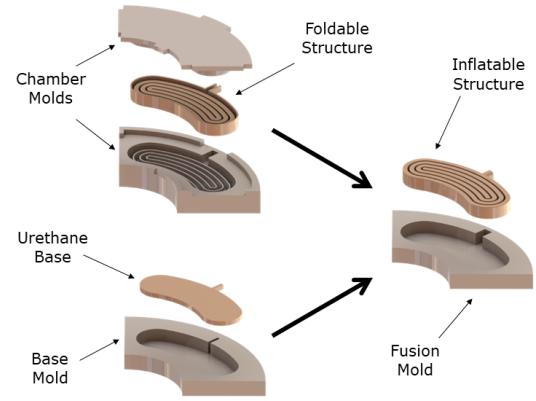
The manufacturing process of the inflatable thumb (made out of Smooth-On Vytaflex 40 silicone rubber) involves the following three molding steps: i) the foldable part of the actuator is fabricated using two molds, ii) the base layer is fabricated using a third mold, with the base layer being 1.5 mm thick and 2 mm smaller than the foldable part in all directions (so that they can be molded together), iii) after both parts are cured, a fourth mold is used to combine the upper and the base layer parts.
